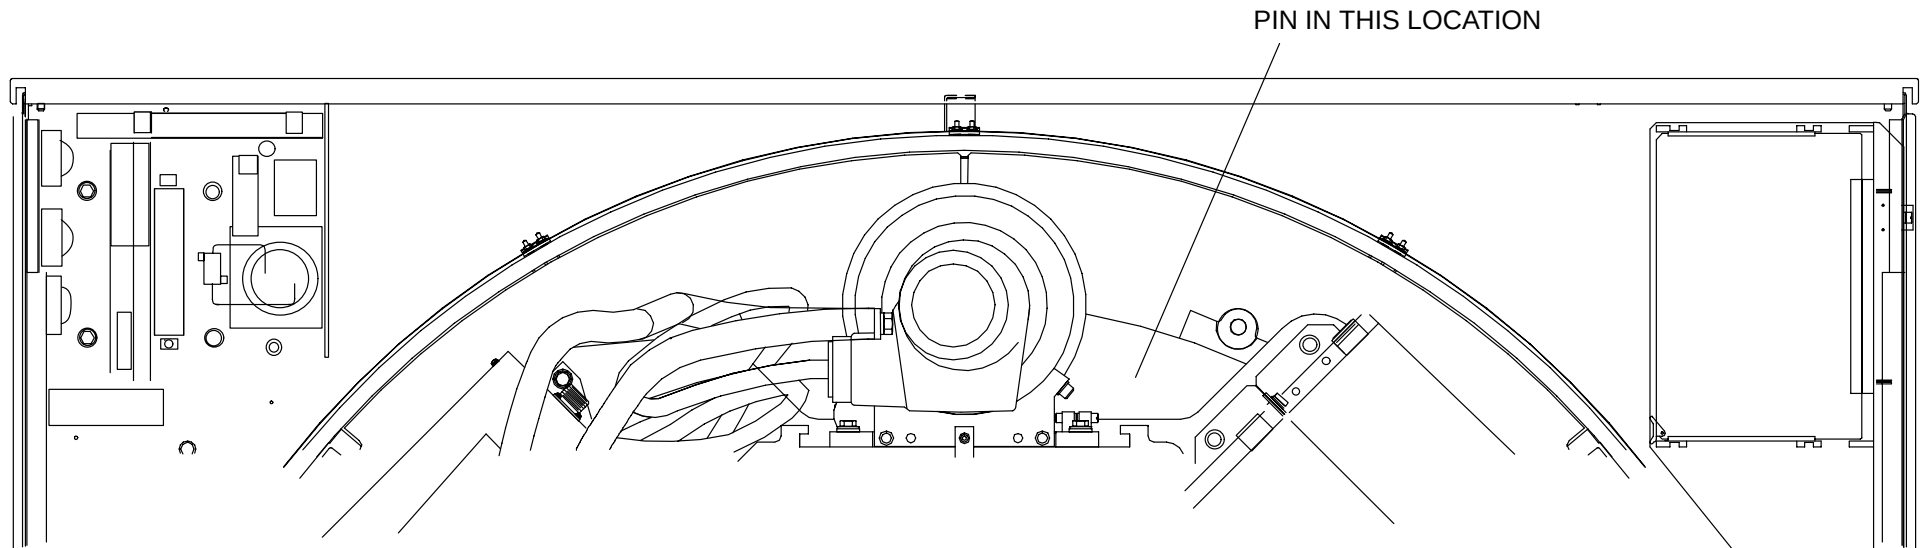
ROTATING FRAME WITH TUBE PINNED AT 12 O'CLOCK
